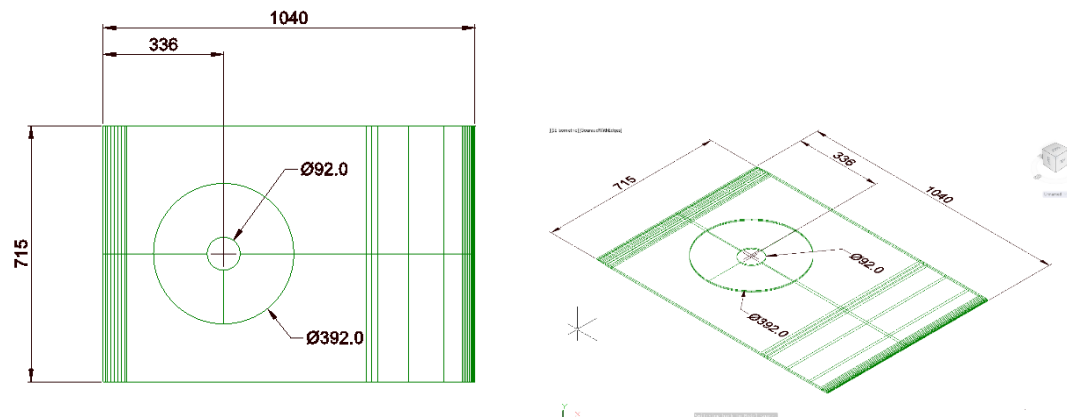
Detailed drawings of the platform. Top left (plan view). Top right (isometric view)
